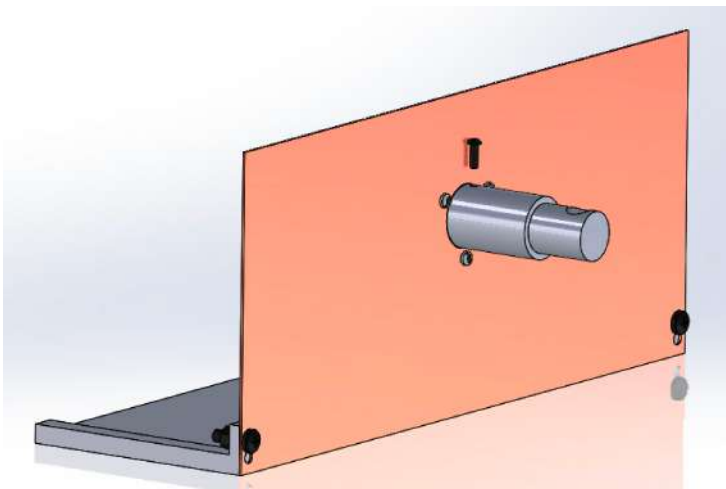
Motor to Driveshaft Adapter connected to motor via a M3 set screw
